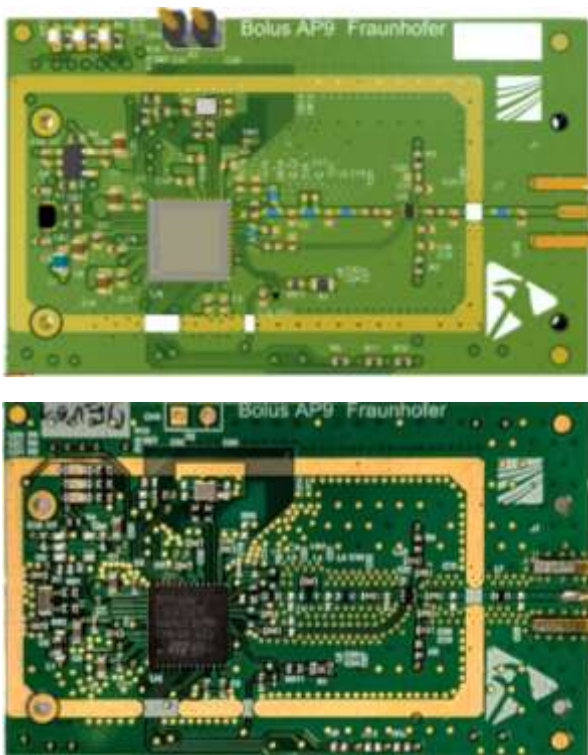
Bolus sensor front-end PCB. Top: layout, bottom: fabricated front-end PCB
